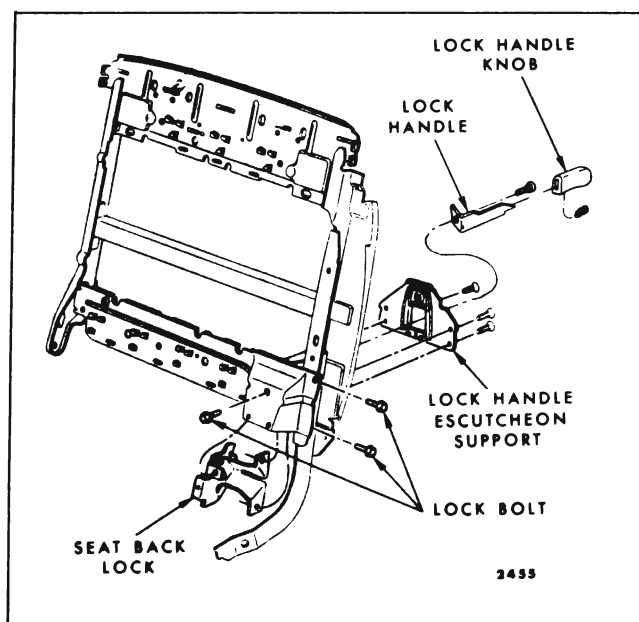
Front Seat Back Lock - "A, B & X"
